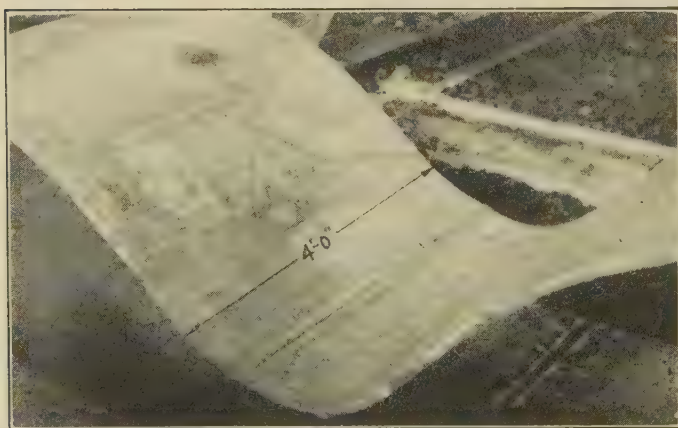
Crushing test on a 65-in. diameter pipe section welded by the Lincoln automatic carbon arc.
